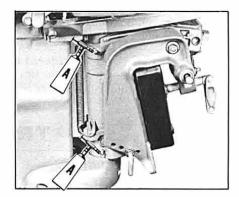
Swivel Bracket Fittings and Reverse Lock
